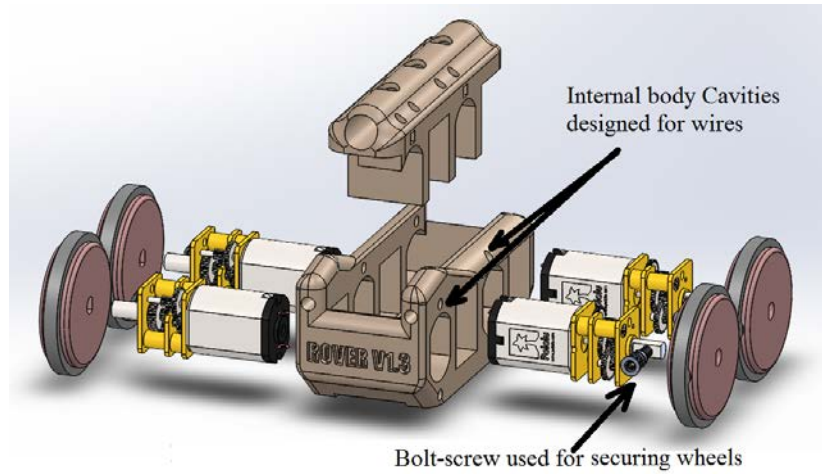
Exploded view of the current design of the inspection tool.
